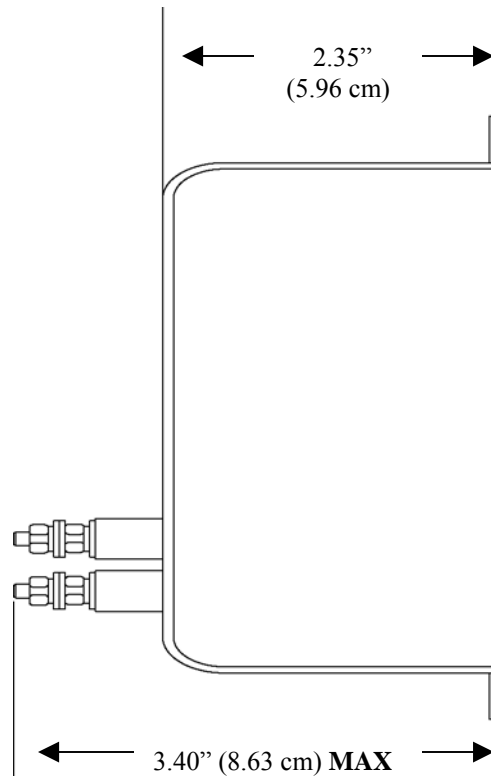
Nexus® 1250/1252 Meter Mounting Diagram, Side View
